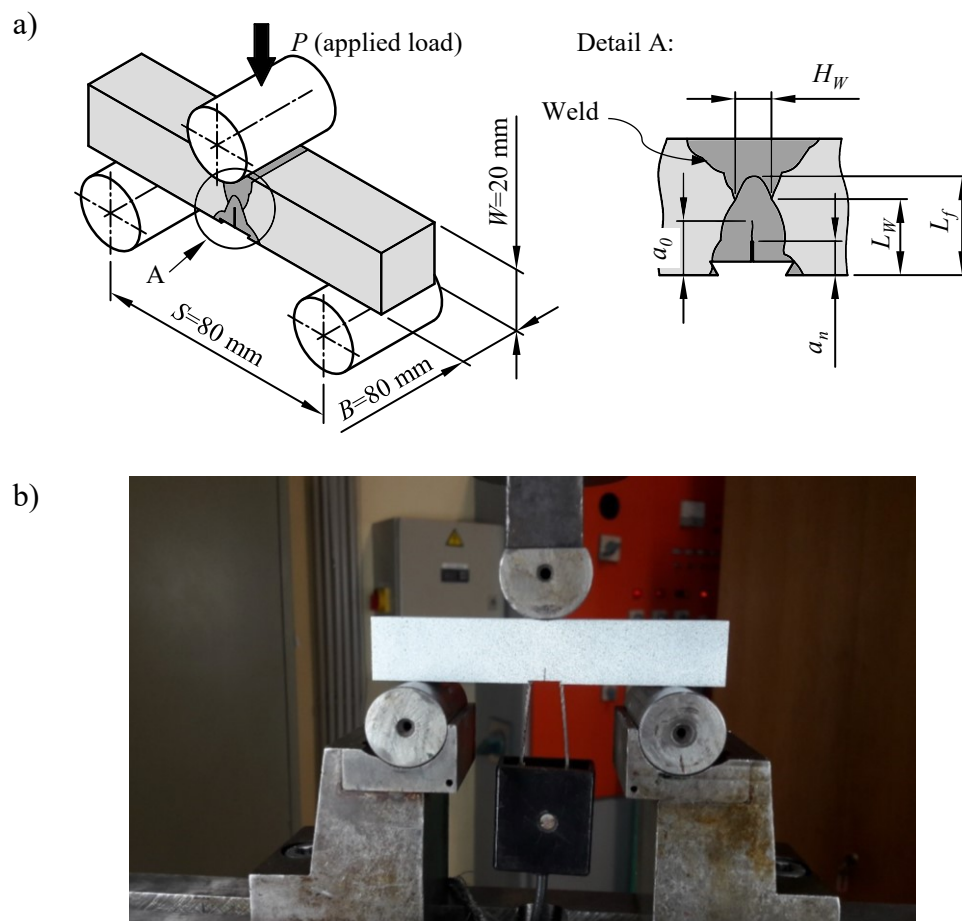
The setup of the fixture system for fracture testing of the SE(B) specimens; a) the corresponding characteristic dimensions and b) the actual fixture setup. Note the mounted clip gauge and applied speckle pattern for DIC measurements.
